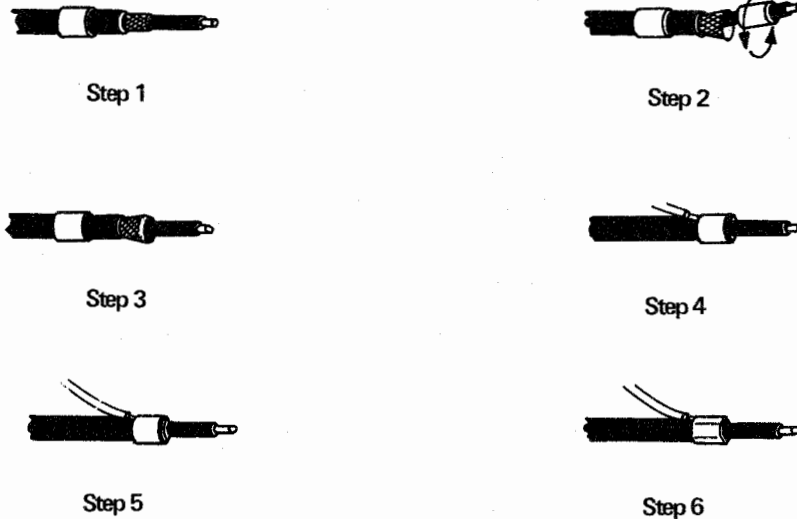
Typical Method of Termination Shields with MIL-F-21608 Ferrules and MIL-C-22520 Crimping Tool
